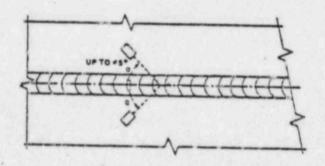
TYPICAL TWO SEARCH UNIT TECH. NIQUE FOR DETECTING TRANSVERSE DISCONTINUTIES IN WELDED JOINTS
